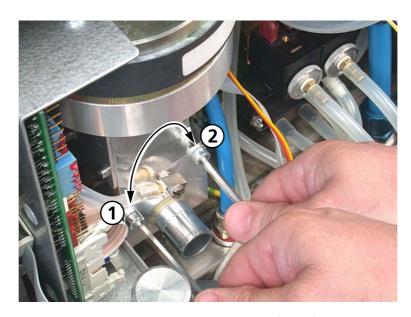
Tightening the hexagonal-drive (Allen) bolts alternately
